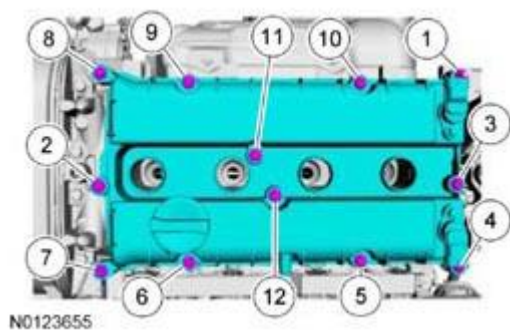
Identifying Valve Cover And Retainers Tightening Sequence
